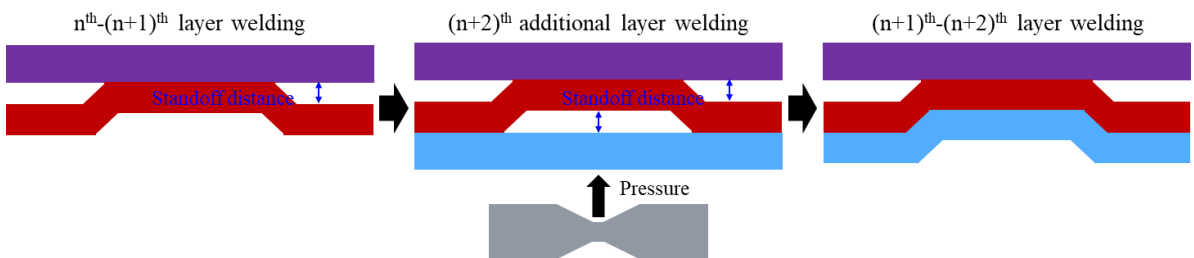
Sequential VFAW process for multi-layer welding
